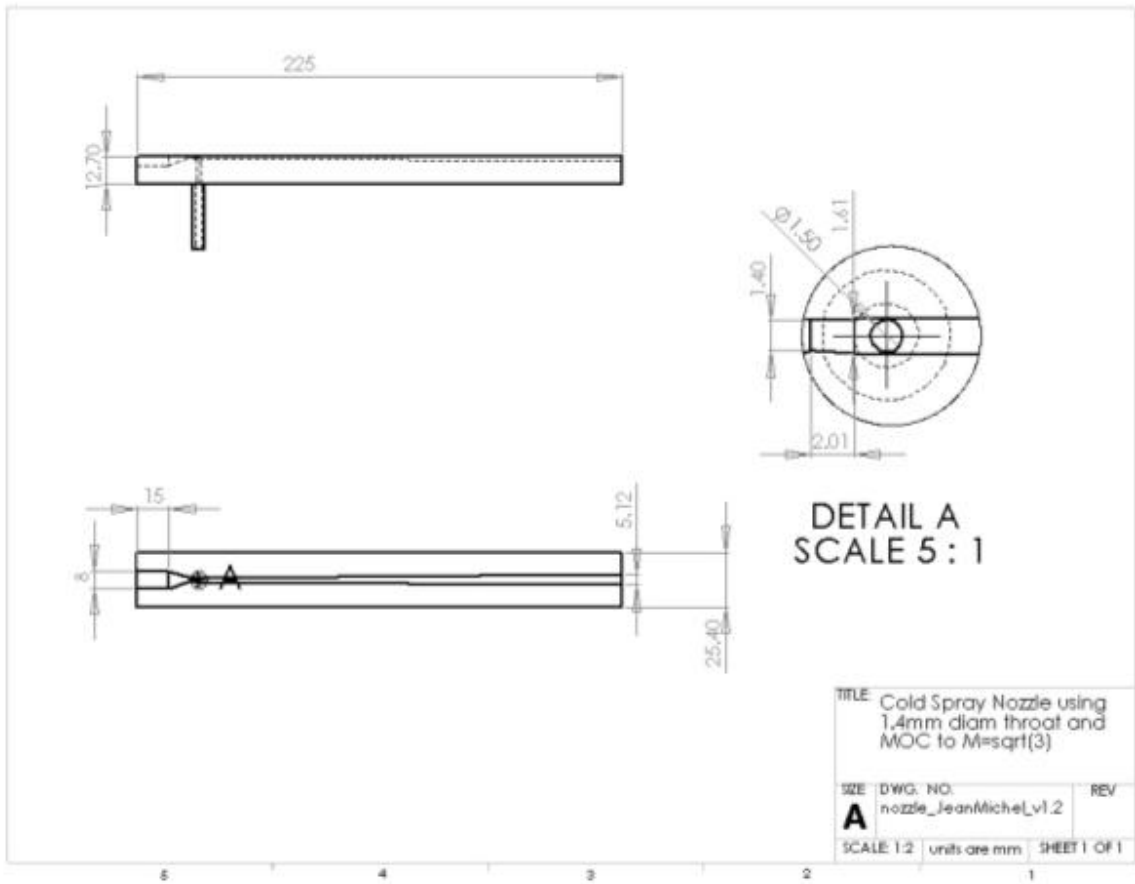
JM Nozzle Technical Drawing (Powder Injection Half Shown Here)
